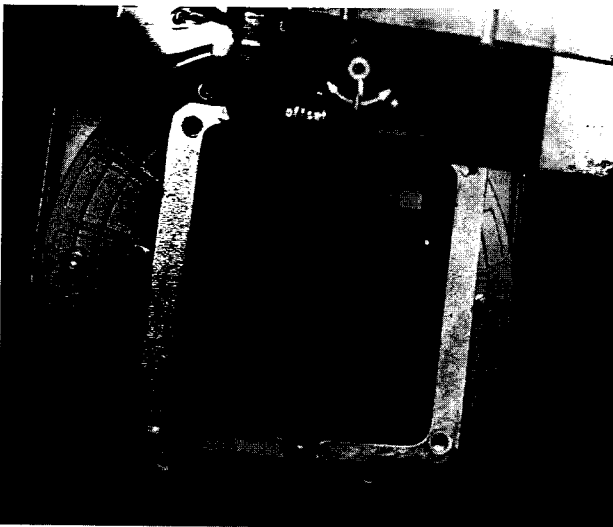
Blower Removed from Burner Assembly (Gasket Shown)
